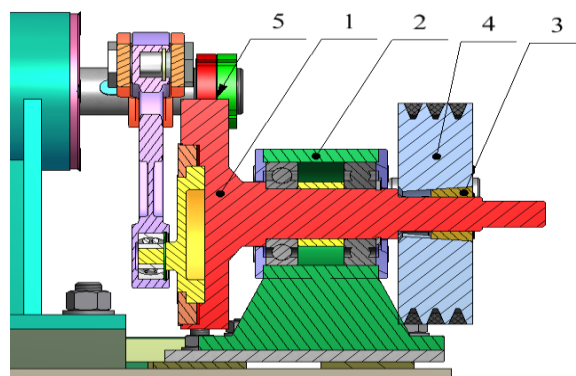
Kinematic transforming mechanism of the experimental test rig [19]: (1) intermediate transmission shaft; (2) intermediate support assembly; (3) quick-change bushing; (4) interchangeable pulley; (5) output flange.
